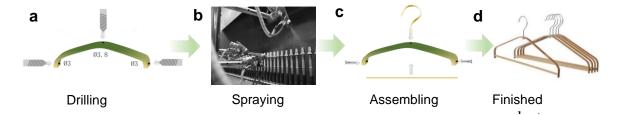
Post-molding processing. a) drilling, b) spraying, c) assembling, and d) finished product
